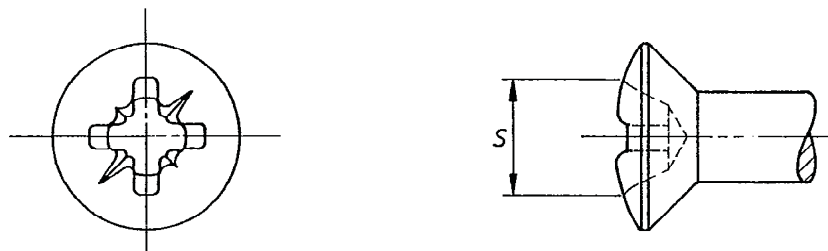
Recessed raised countersunk head machine screws: enlarged views of recess type V
